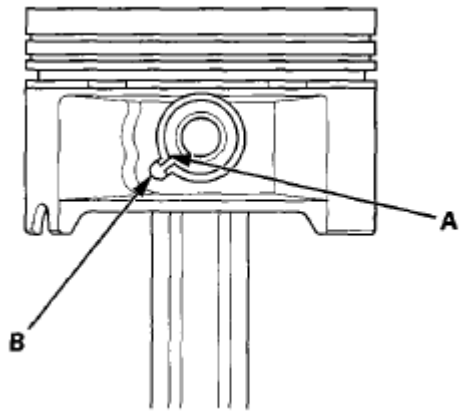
Identifying Piston Pin Snap Rings And Piston Pin Bores
